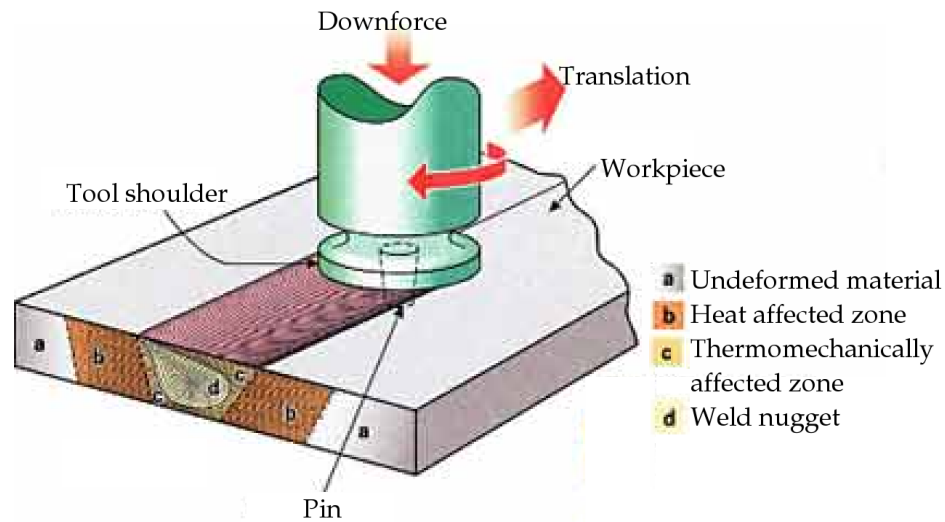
The FSW process for seam welding (from Smith et al., 2004)
